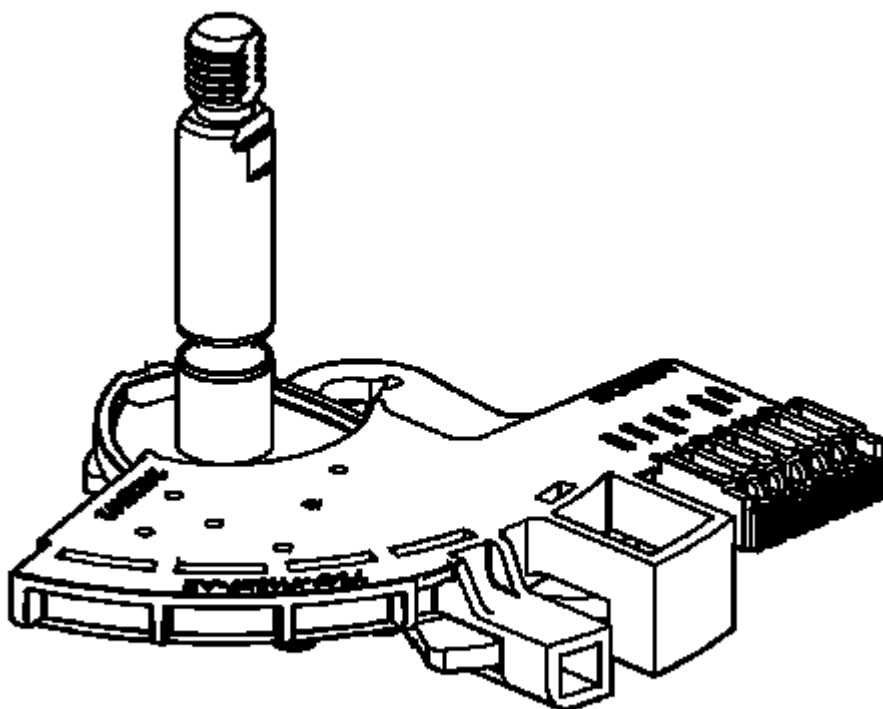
Identifying Manual Shift Detent Lever with Shaft Position Switch
